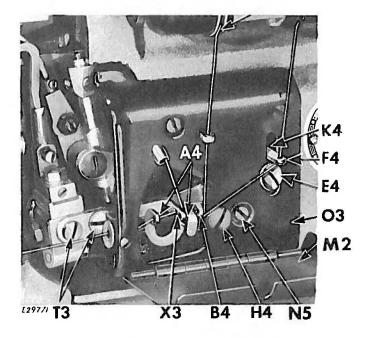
Adjustments on Take-up for Two-thread Stitch and Three-thread Tight Needle Thread Stitch
